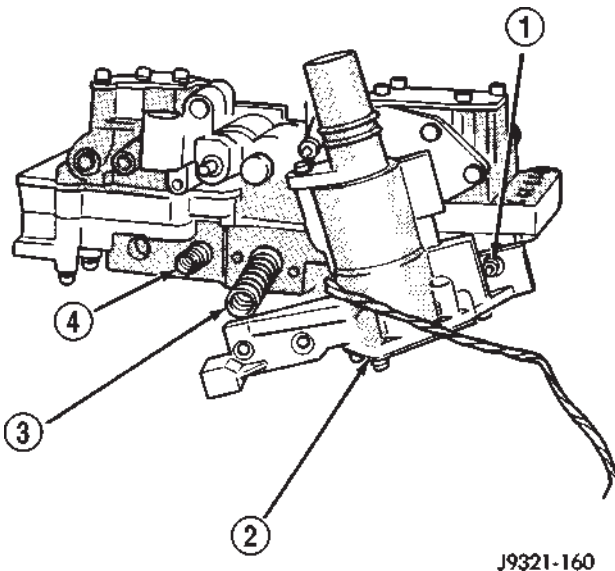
Converter Clutch And 3-4 Shift Valve Springs
